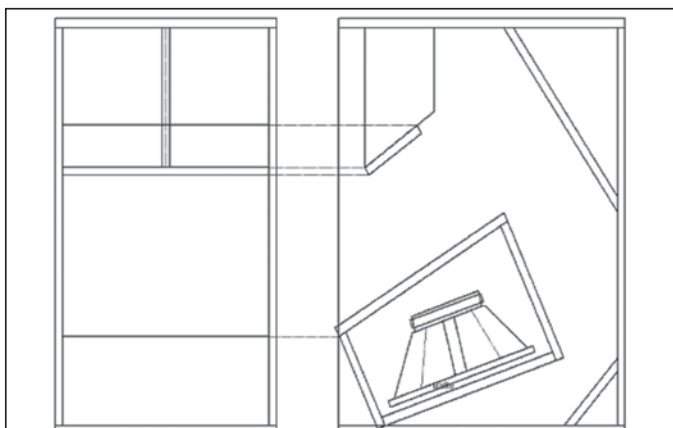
The front and side view of my 50Hz drawing design uses JBL 2226 15" woofer and a sealed back chamber.
